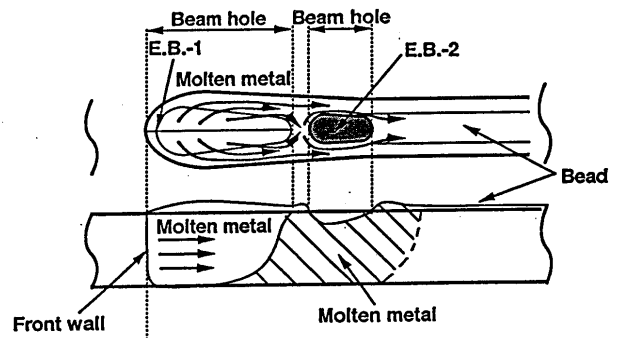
Suppression mechanism of weld defects in high speed TEB welding.
